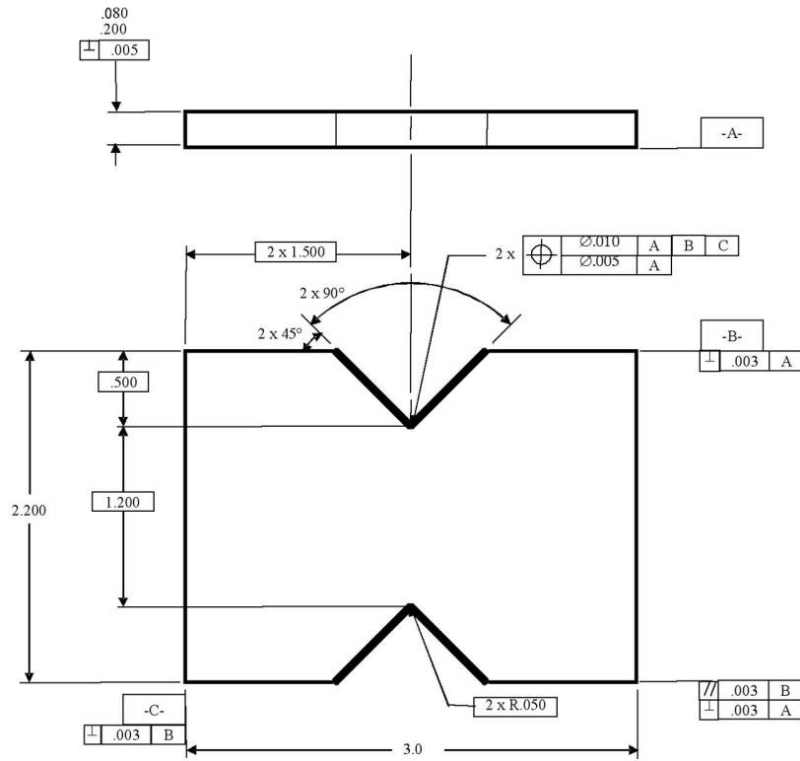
Shear Specimen Drawing for ASTM Test D7078
